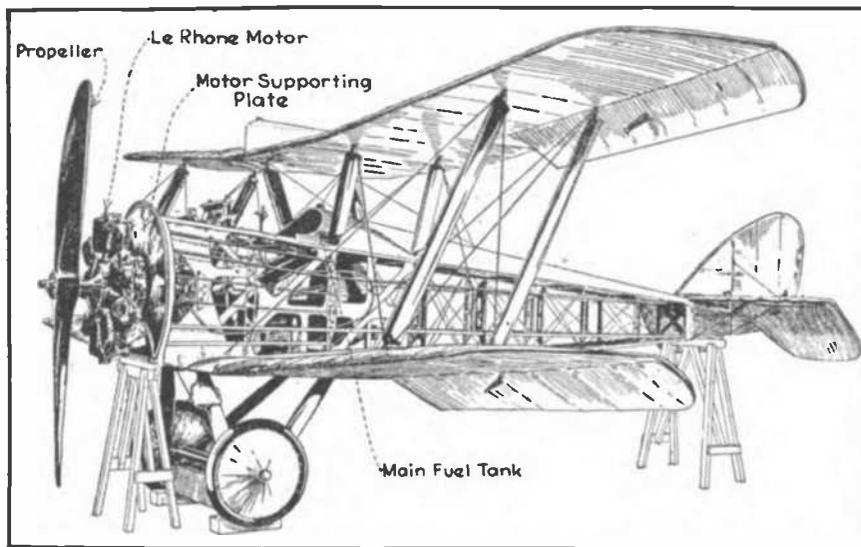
View of DH-5 airplane, showing how easily rotary motor is installed
